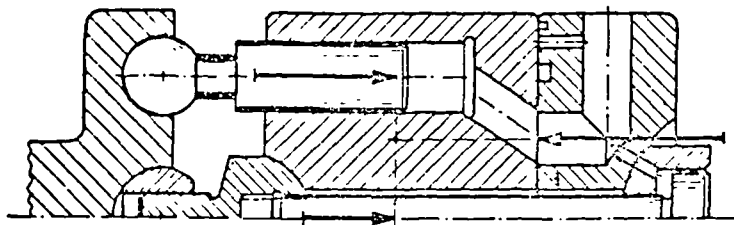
SUSPENSION OF THE CYLINDER BLOCK WITH KIDNEY PORTS ON REDUCED PITCH RADIUS AND WITH EXPANSION CYLINDER ON THE AXIS.
